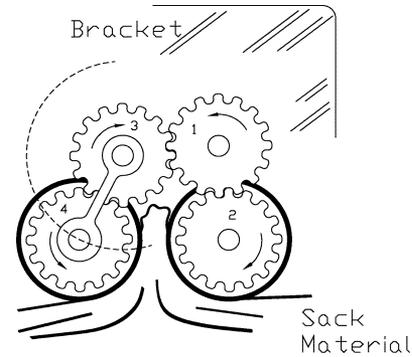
When the rollers come in contact with a sack, the gears turn the rollers inwardly to grab and drag the sack into the end-effector via frictional forces.
